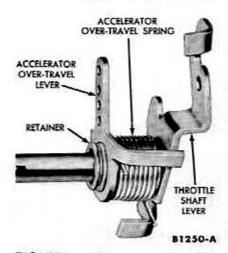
Accelerator Over-Travel Spring and Lever Installation
